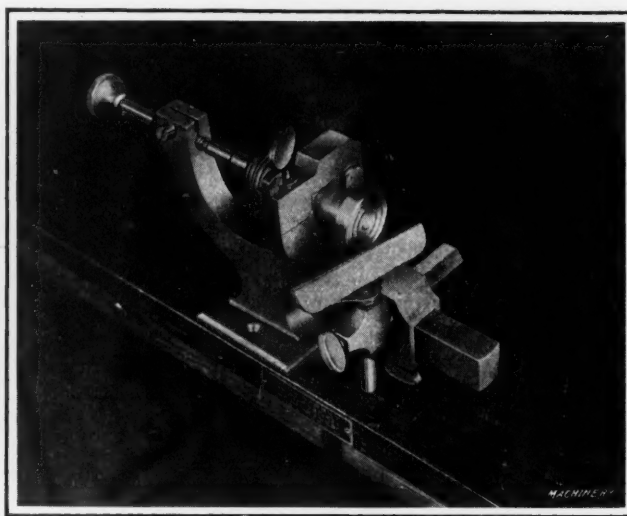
Special Type of Lathe used for refinishing a Mounted Diamond Wire-drawing Die
